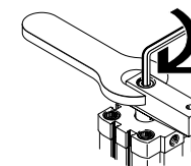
Tighten the retaining screw/拧紧固定螺丝
